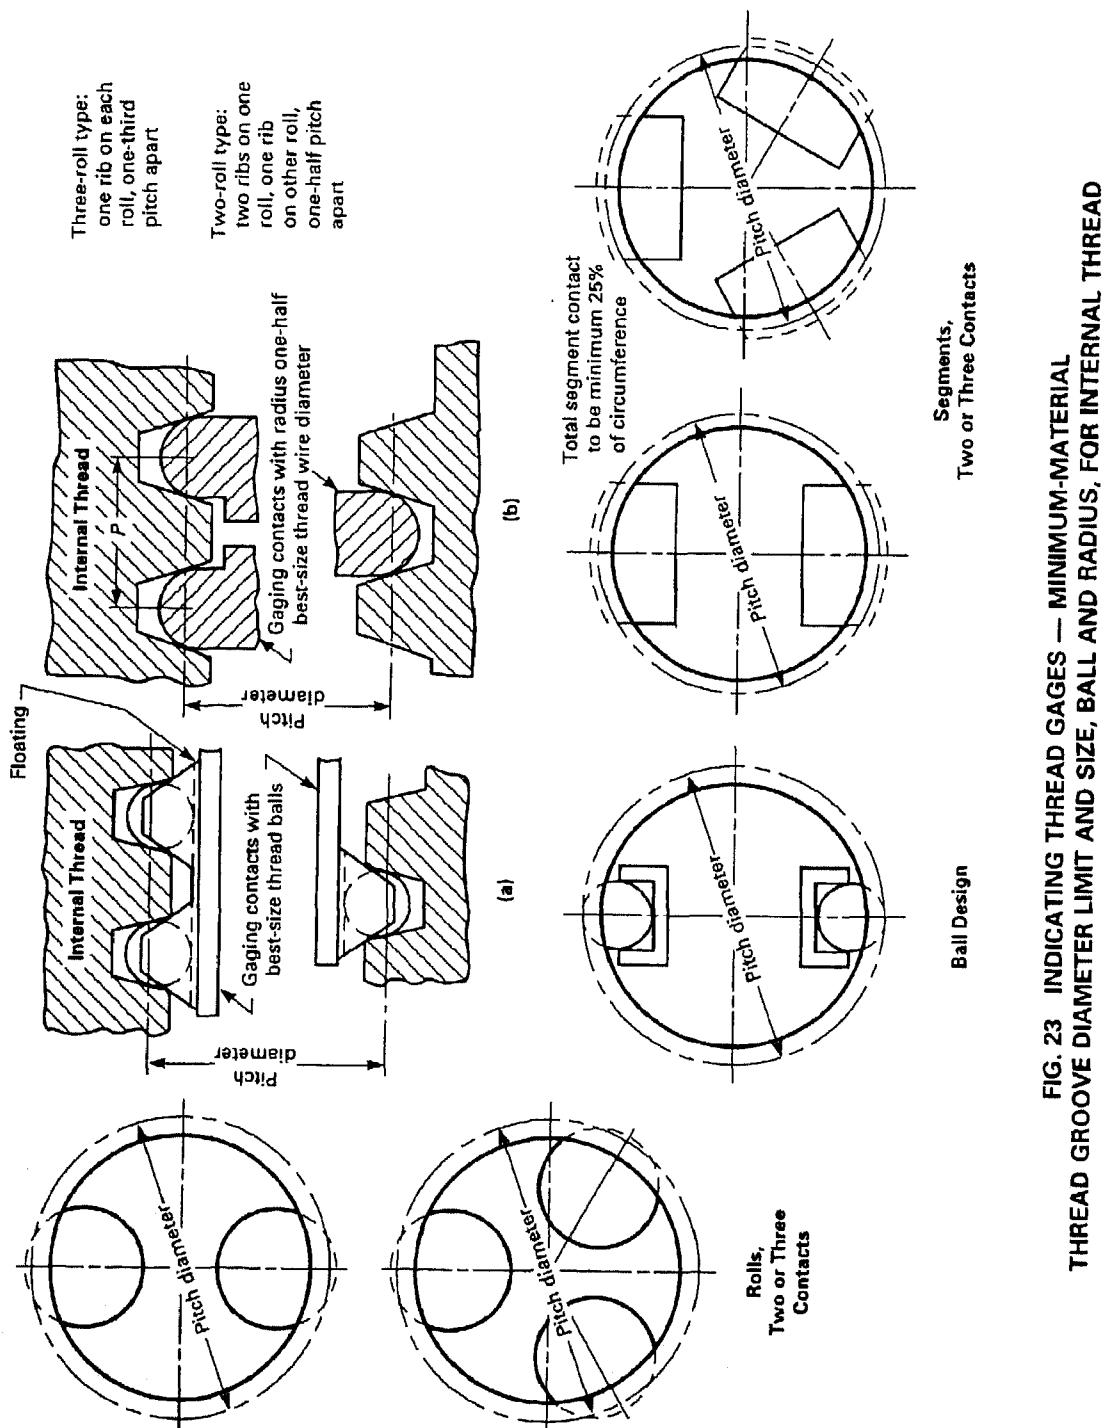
INDICATING THREAD GAGES — MINIMUM-MATERIAL
